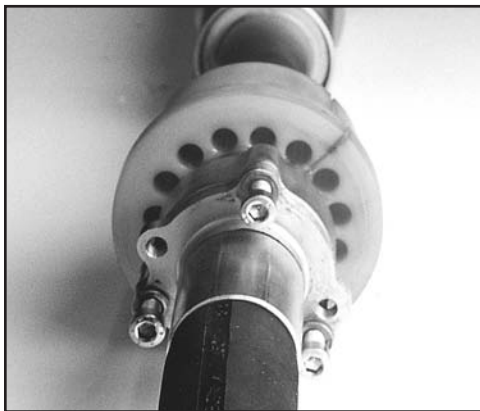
REMOVE 3 SOCKET HEAD CAP SCREWS
